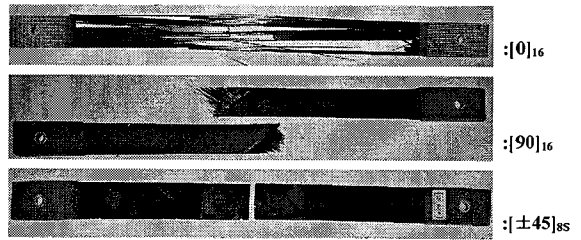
Photos of fracture specimen of carbon/epoxy.
